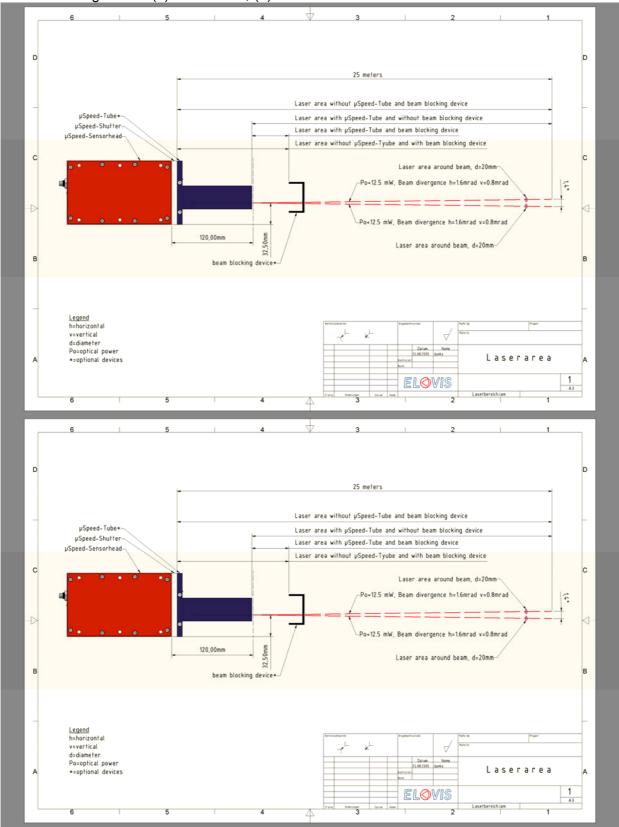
Dimensional drawing of μSPEED-smartsensor (all measures in mm)
